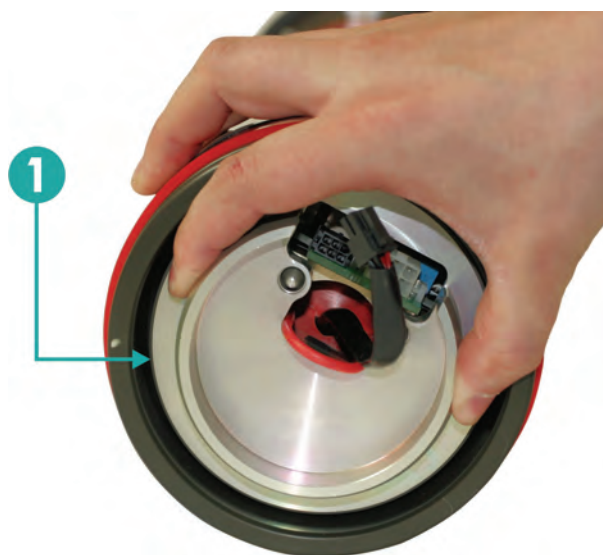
Transducer End-Cap removed from the Transponder Housing
